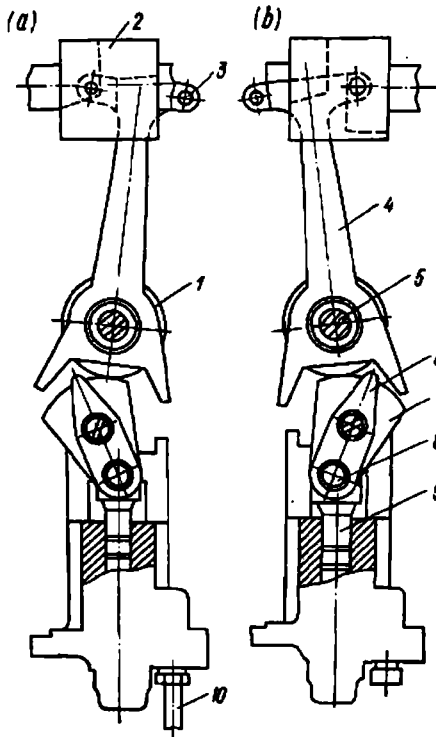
Interlocking gear of ДП 30/50 diesel engine (a) fuel delivery interlocked; (b) interlock cleared and fuel delivery beginning
